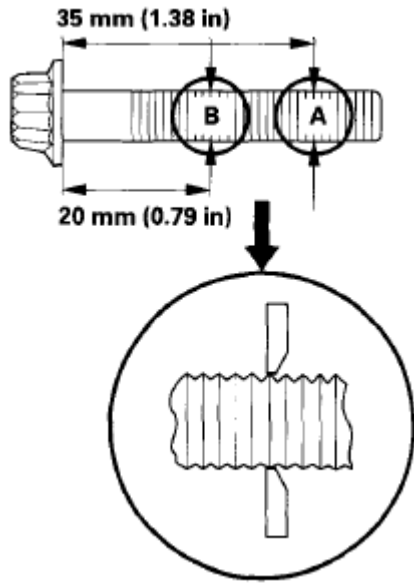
Identifying Connecting Rod Bolt Diameter At Point A And B
